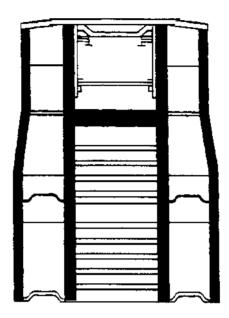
Examples of box sections to be found on the underside/floor of a vehicle cab
